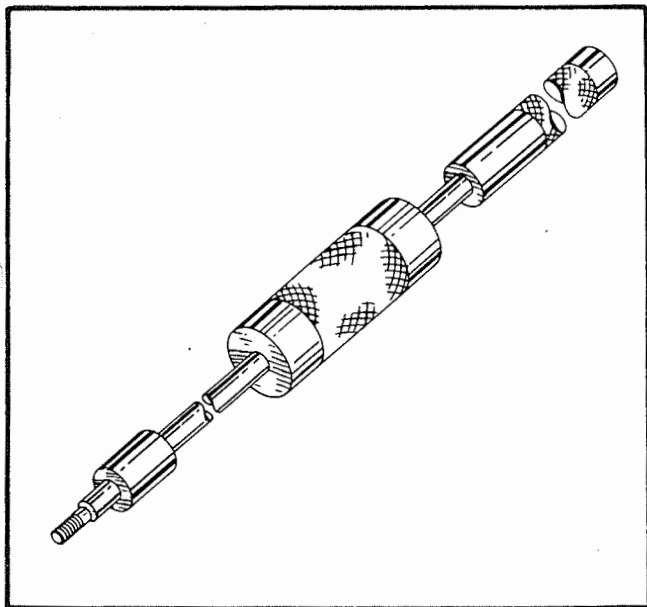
Fuel Pump Drive Shaft and Support Puller
